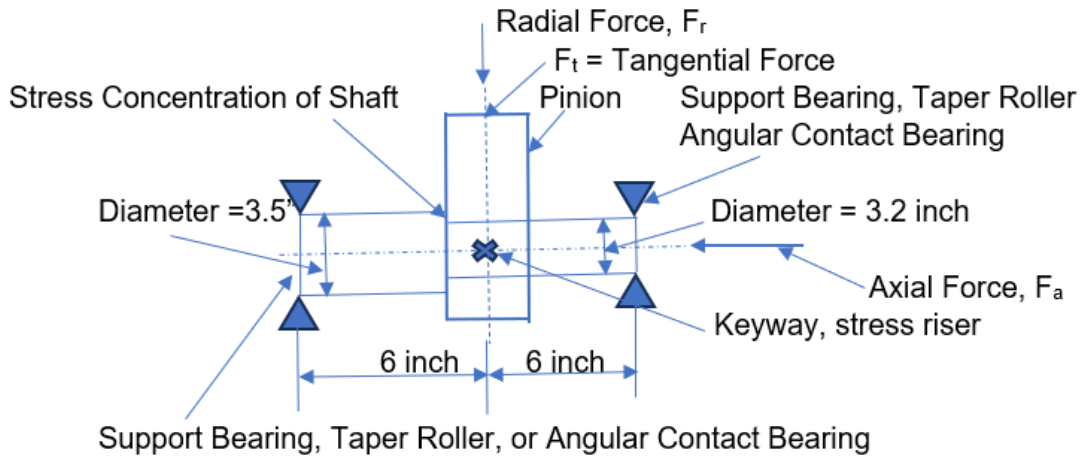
Shaft and Pinion Arrangement for Force Analysis
